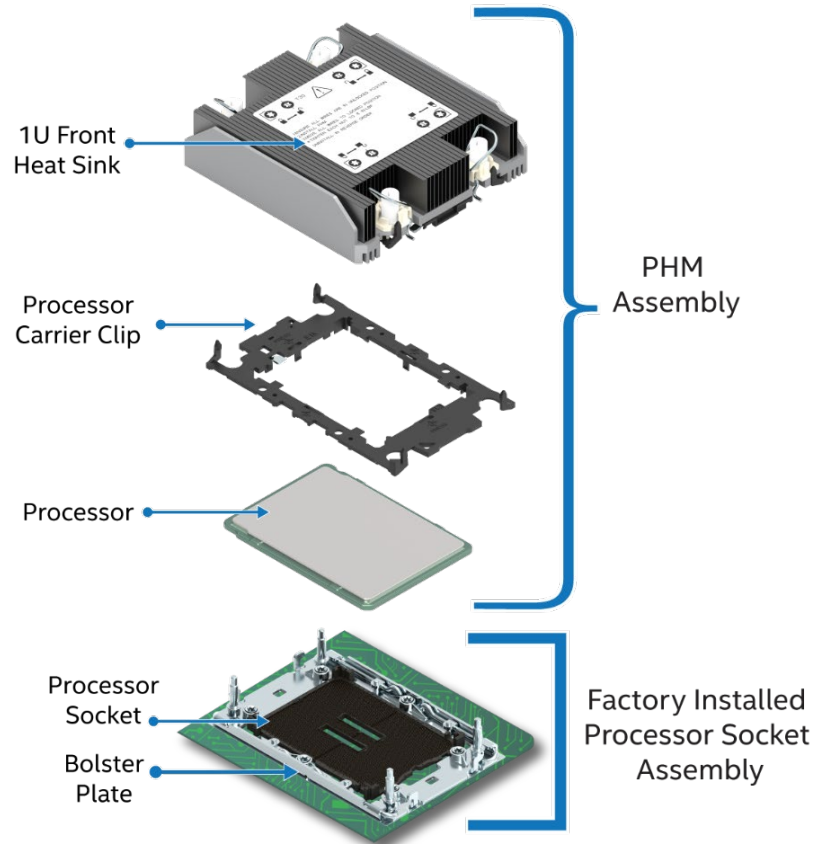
Processor Components and Processor Socket Reference Diagram with Standard Heat Sink
